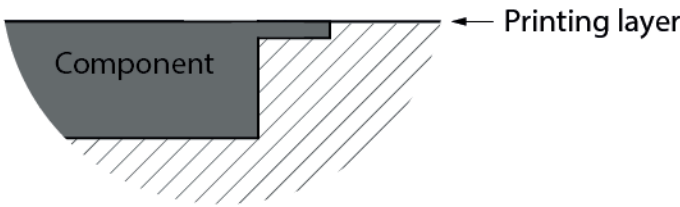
Schematic cross section of placing a component underneath the printing surface to avoid collisions with the printhead.
